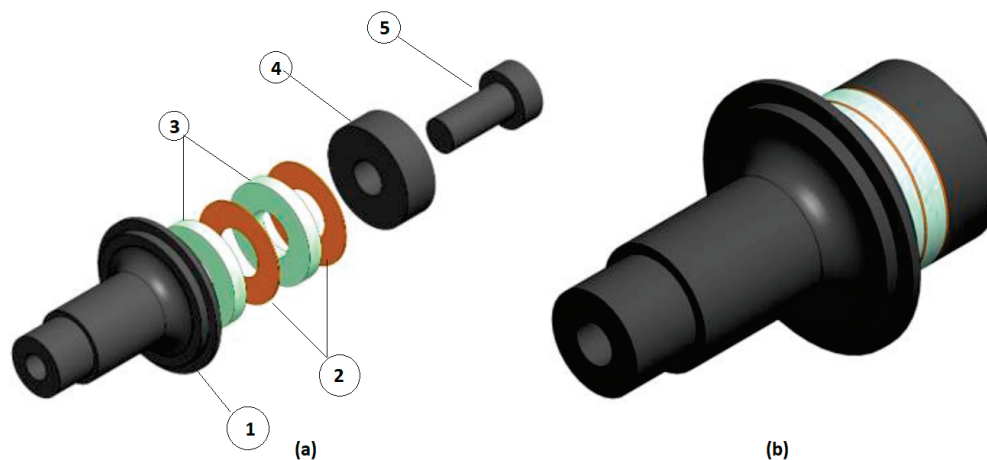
(a) Transducer components: (1) front mass, (2) piezoelectric rings, (3) electrodes, (4) back mass, (5) steel bolt and (b) Assembled transducer.
